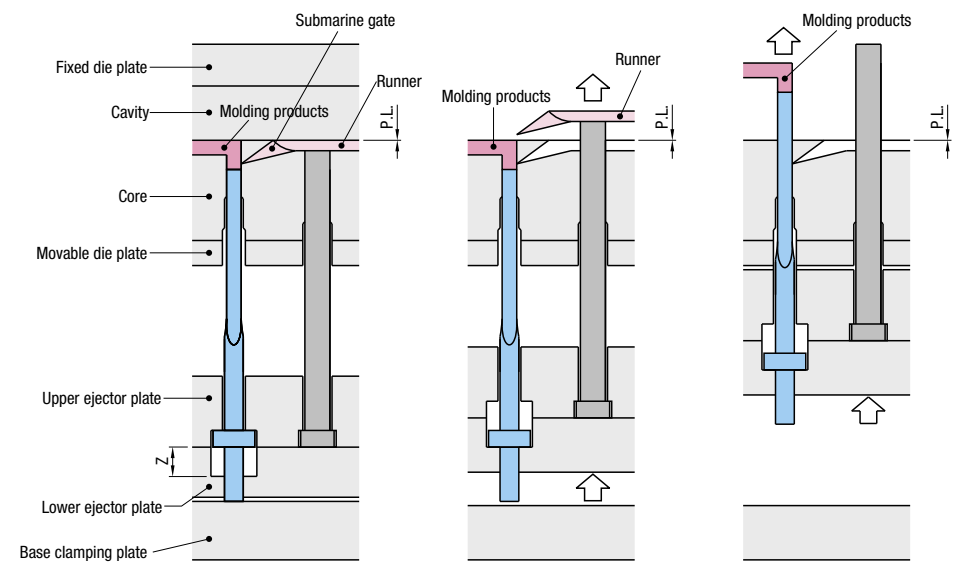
· Mold closed Fig. 2 · Mold opening Fig. 3 · Mold opened
